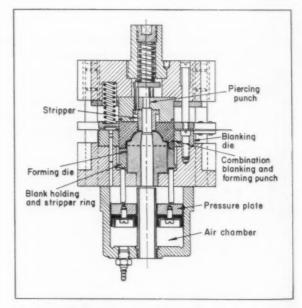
Shown in the closed position with the workpiece completely formed, this one-stroke progressive die set does a job originally handled in four separate operations in conventional progressive dies.
